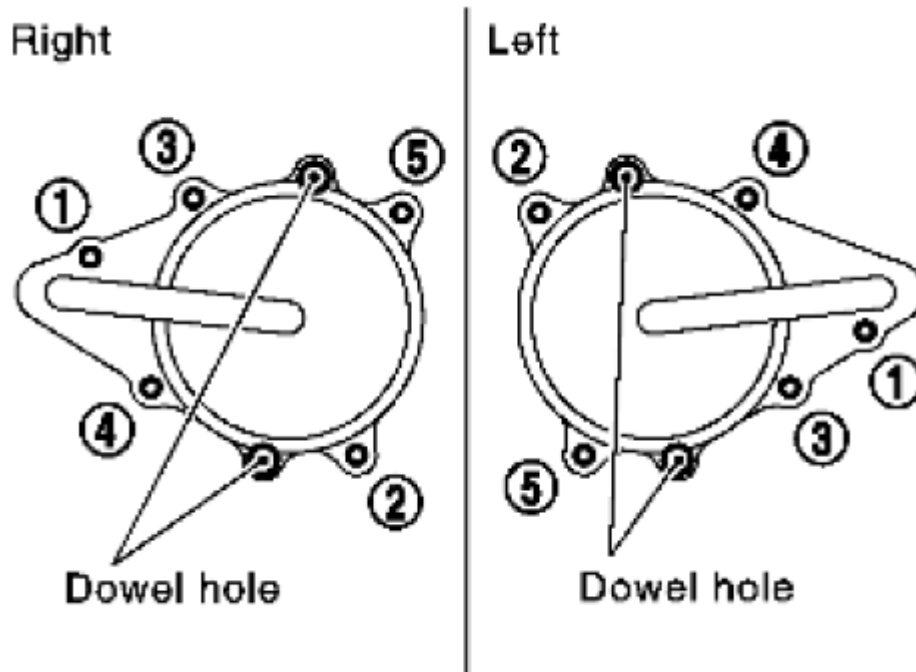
Identifying Right And Left Intake Valve Timing Control Covers
